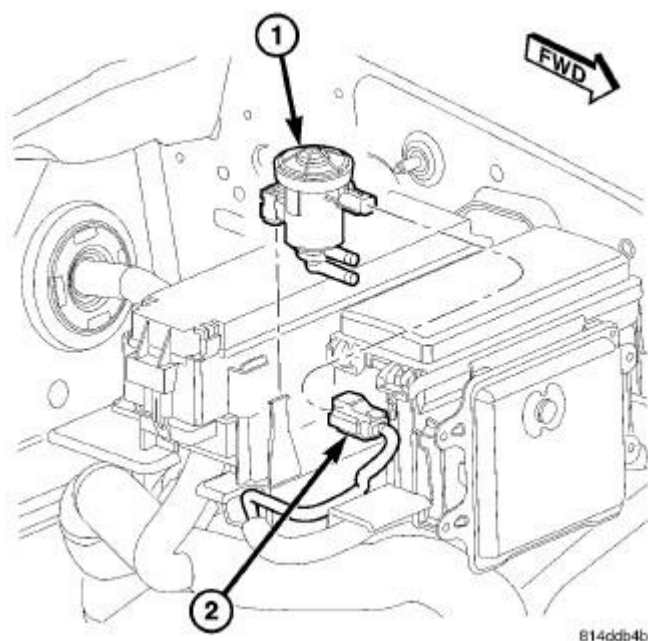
Identifying Battery System Components, Power Distribution Center & Integrated Power Module
